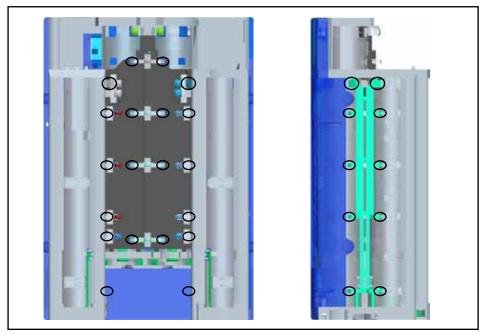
Rear and side view of coin cassette all 45° surfaces accessible
